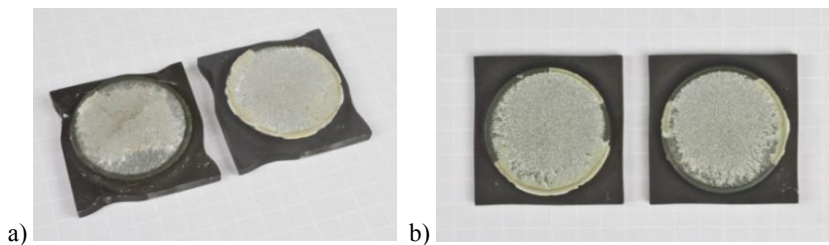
Fracture H-F specimens after torsion tests: (a) testing at 600/760 °C; (b) testing at 800°C.
